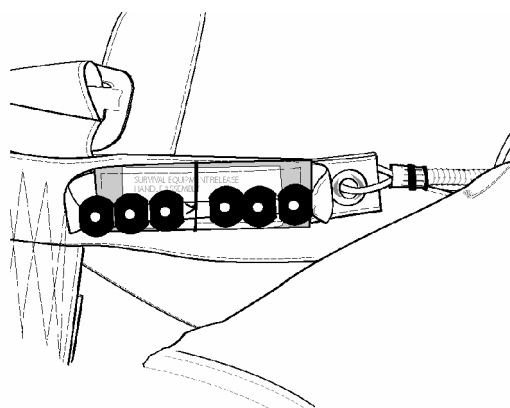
Tying Beaded Handle/Securing Handle to Fastener Tape
